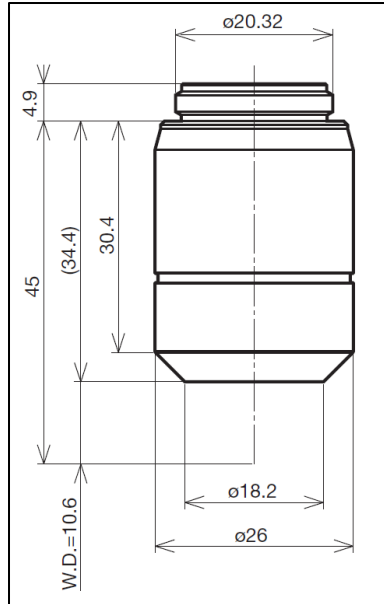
Mechanical Drawing of the LMPLFLN50X Objective [27].
